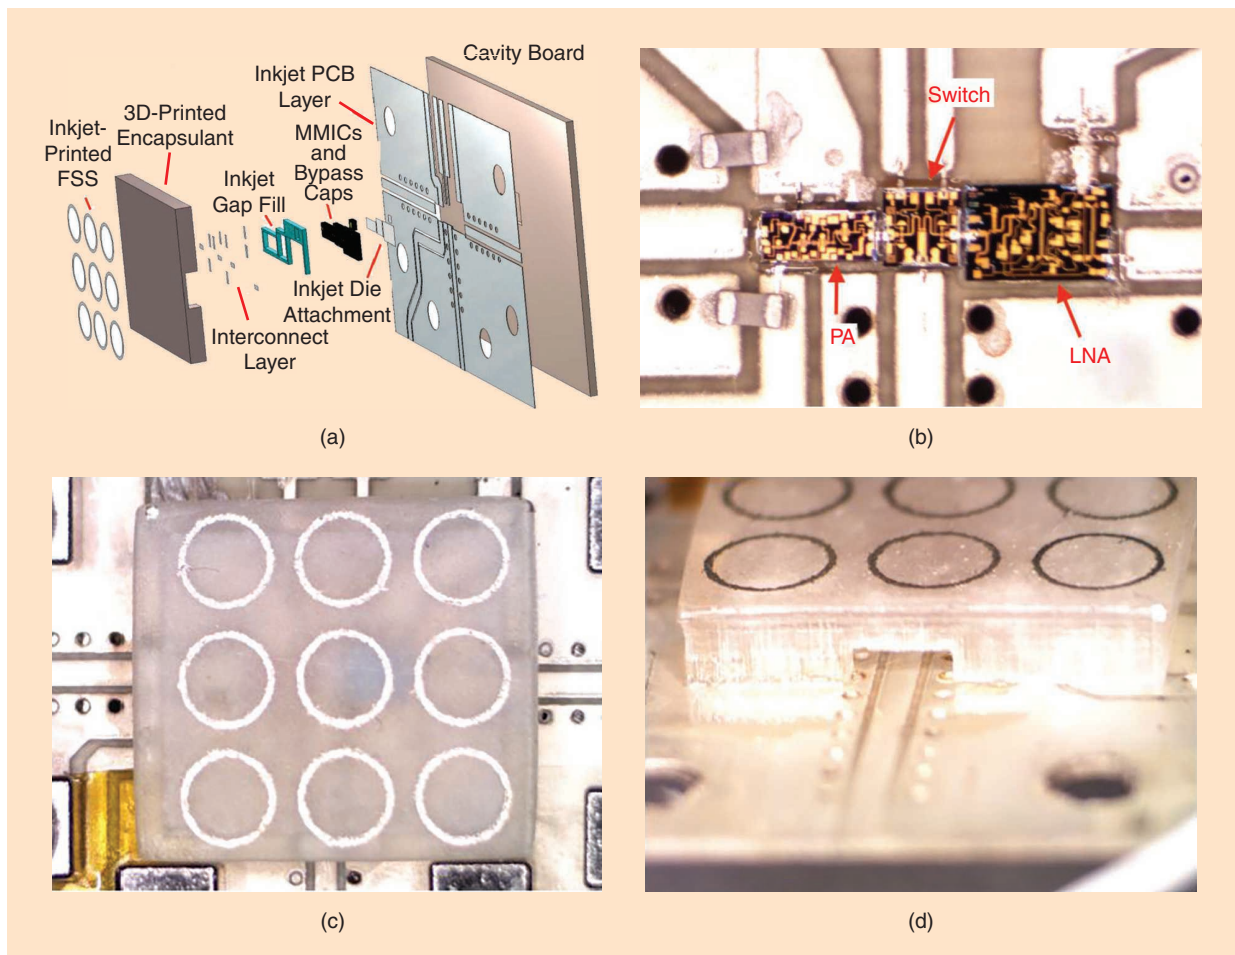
(a) An exploded view of the complete encapsulated RF front-end MCM with an additively manufactured multilayer structure. (b) A nonencapsulated mm-wave front-end MCM fabricated using inkjet printing (c) A 24-GHz FSS inkjet printed on top of the 3D-printed encapsulation. (d) A perspective image showing the cavity and the FSS-enabled “smart” encapsulation of the front-end MCM [15]. LNA: low-noise amplifier; PA: power amplifier.
